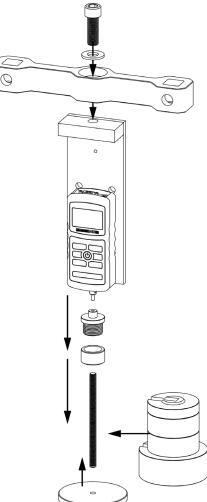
Weight Hanging Kit Assembly with L-Bracket
